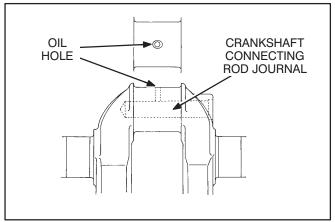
OIL HOLE IN THE CRANKSHAFT CON-NECTING ROD JOURNAL
